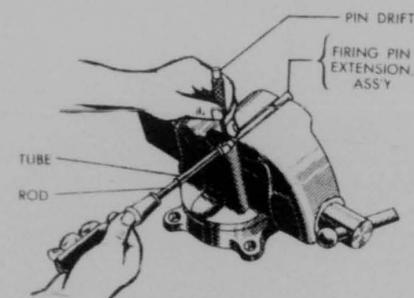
Using Firing Pin Spring Removing Tool 41-T-03098-000 (B243646).
